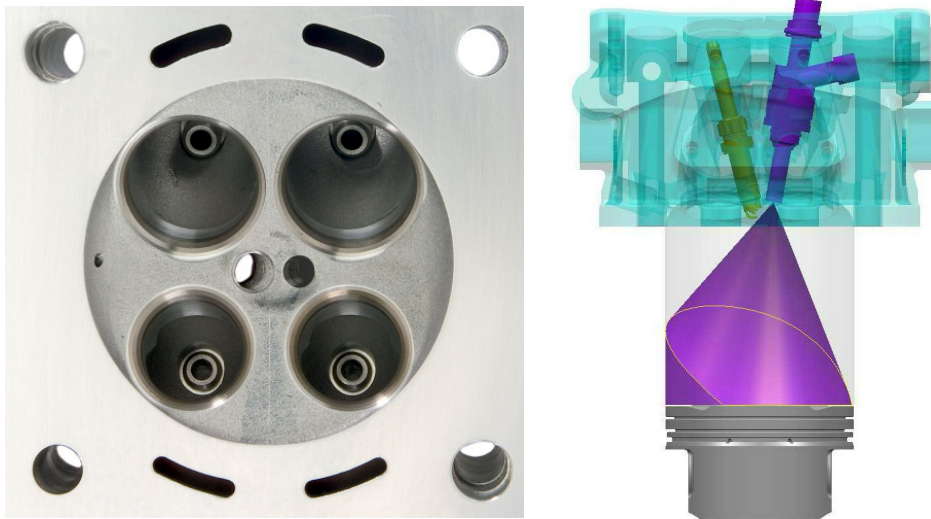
View on fire face of cylinder head of single-cylinder test engine (left) and combustion system layout (right). (Photograph and illustration courtesy Lotus Engineering)
